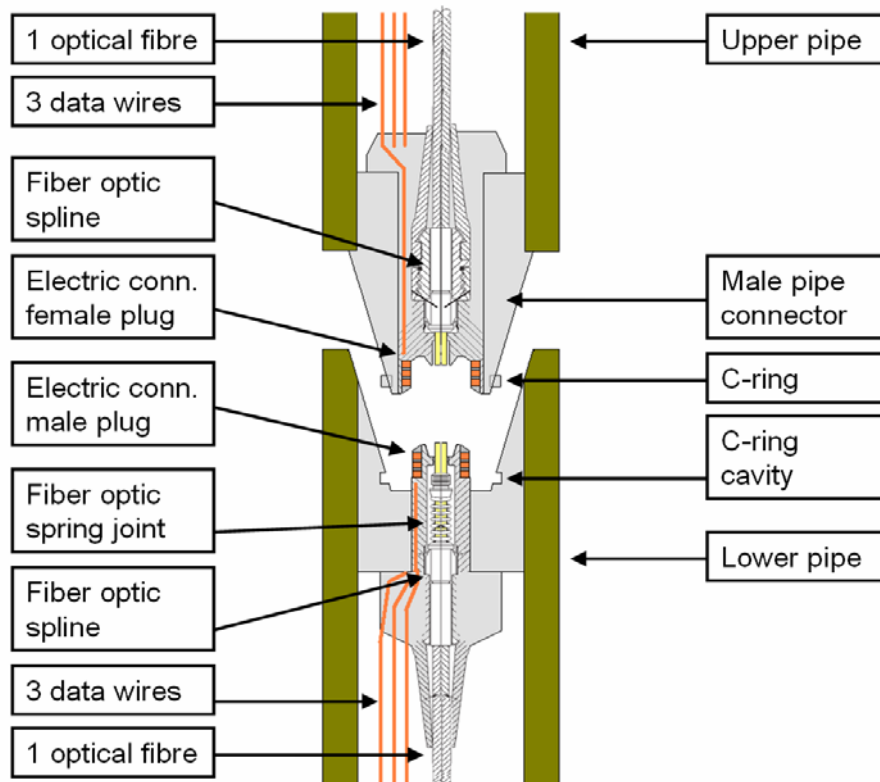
Pipe connection with electrical and optical joint (Image: MA).
